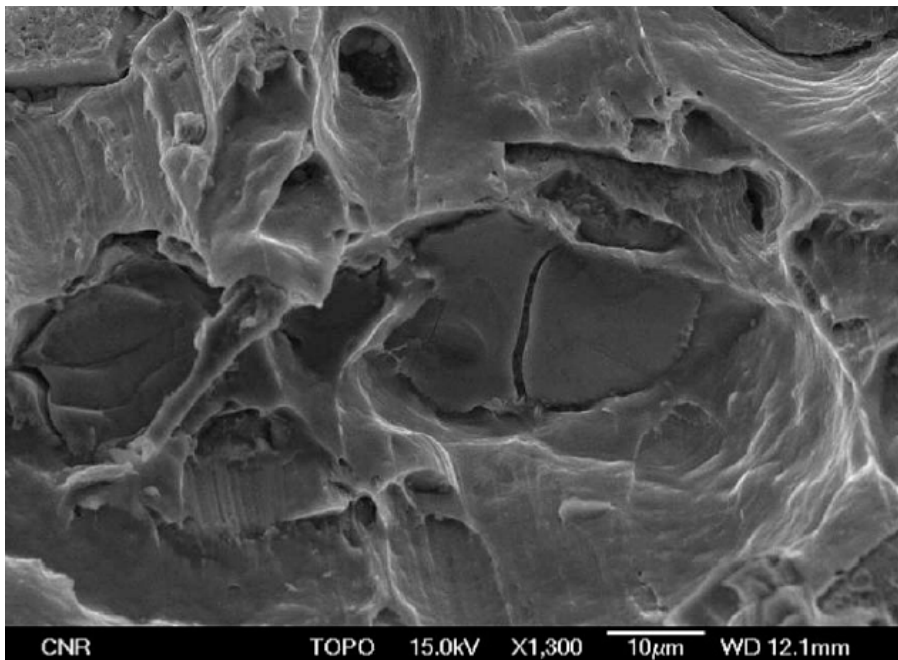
Particle fracture in FSW Al 6061/Al₂O₃/20p [21]
